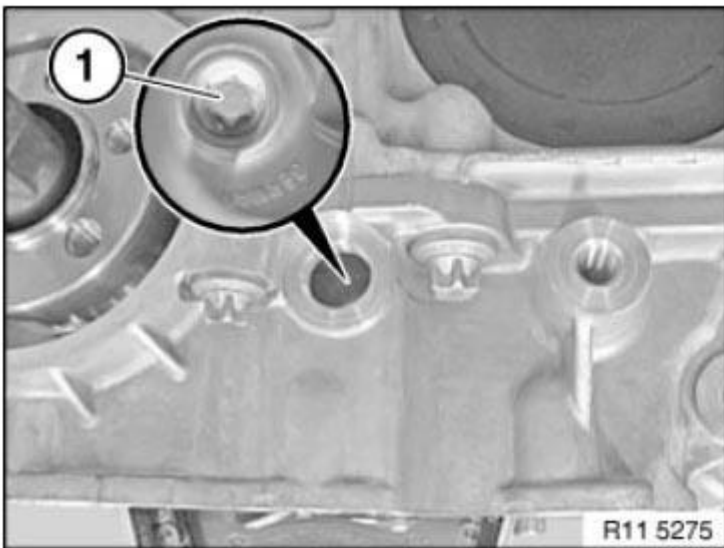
Identifying Oil Pump Triangular Drive Mounting Screw
